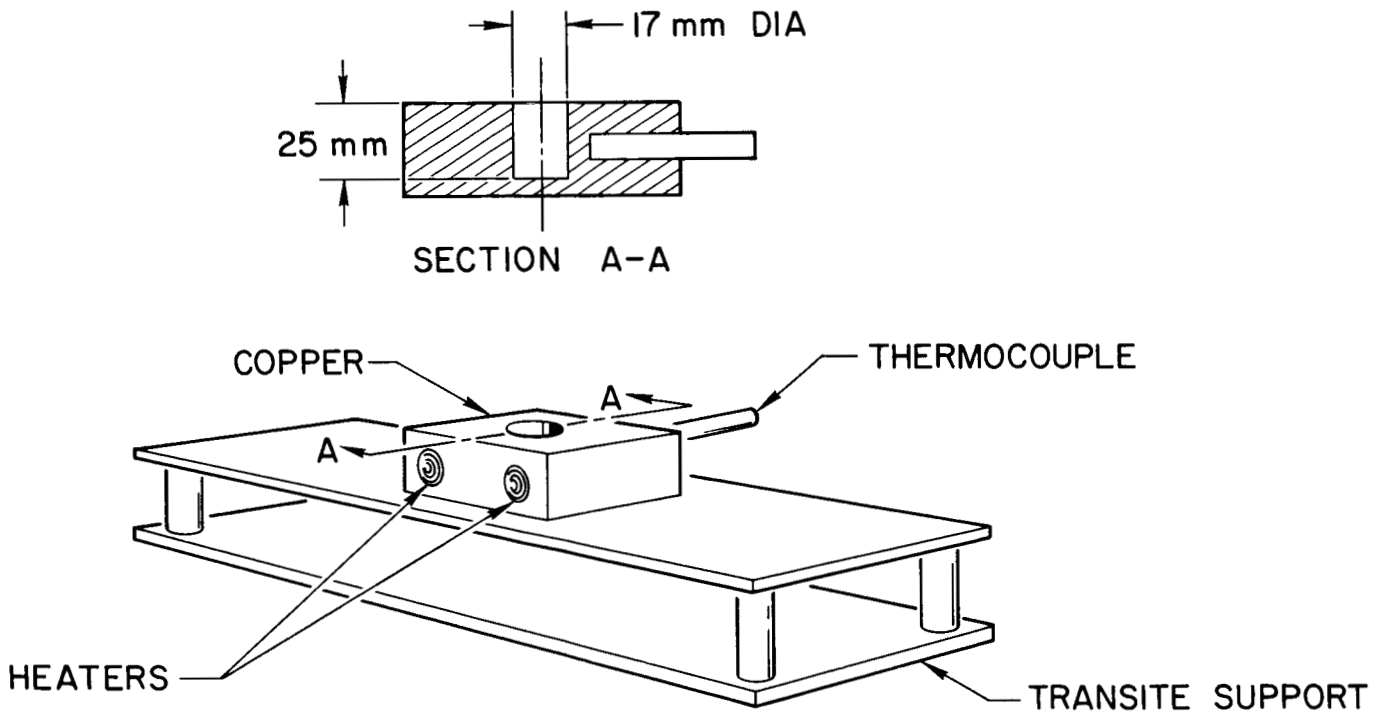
Fixture for soldering 1-1/4 inch stud package
